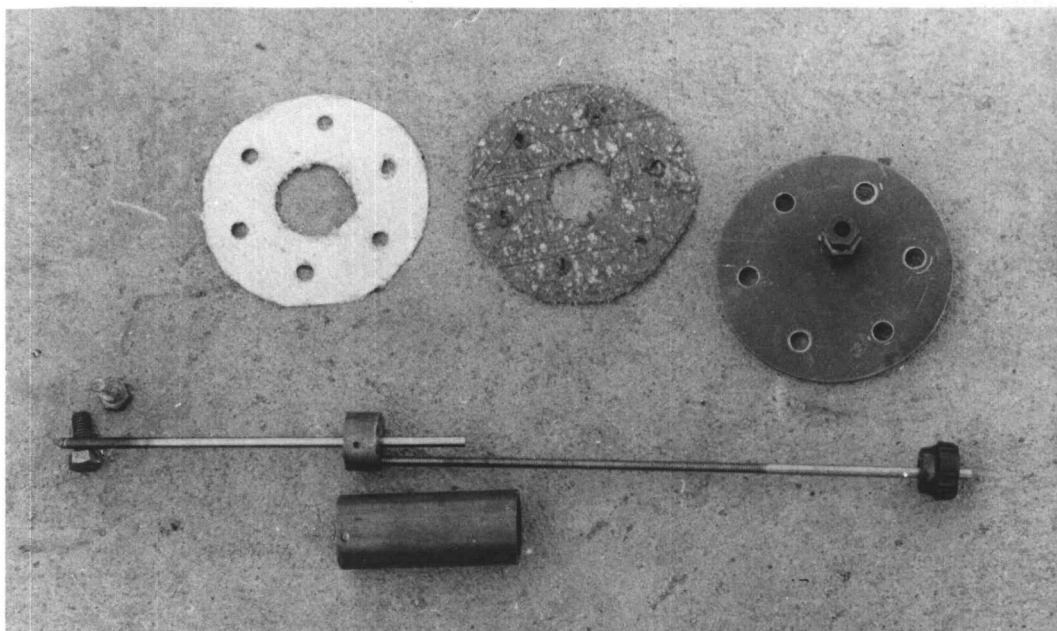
Electrode assembly. Shown are the asbestos and "durable" gaskets, and flange plate. The tungsten electrode was held in the copper holder by means of a set screw. The holder was moved up or down by means of the threaded copper rod. The copper cylinder at the bottom was used to give steadier slide operation and fit over the electrode holder.
